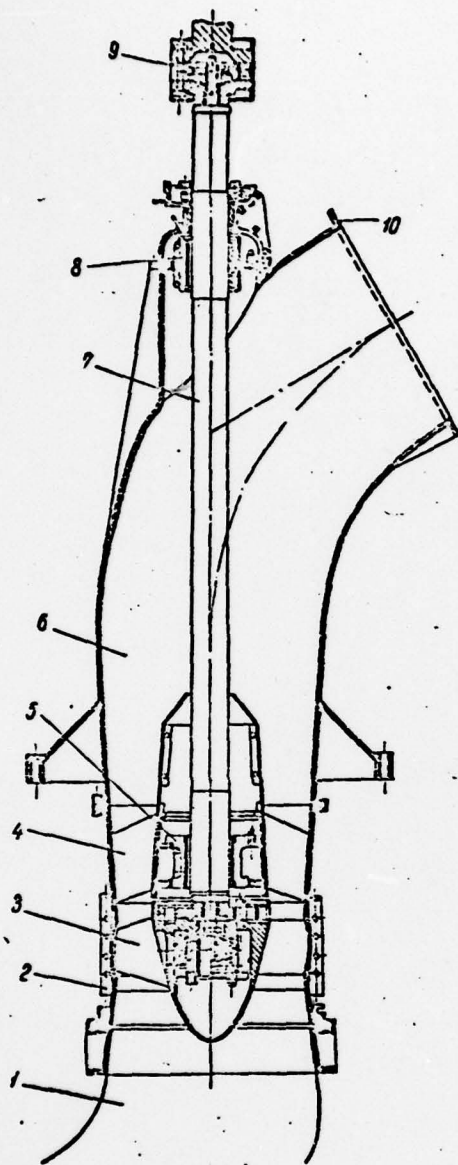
Vertical axial pump of type "BP". 1) Curved intake pipe - intake; 2) Rotor-wheel chamber; 3) Blade of rotor wheel; 4) Blade of return-circuit rig; 5) Lower guide bearing; 6) Exhaust pipe; 7) Pump shaft; 8) Upper guide bearing; 9) Coupling, with drive mechanism for rotating blades; 10) Pressure flange.
